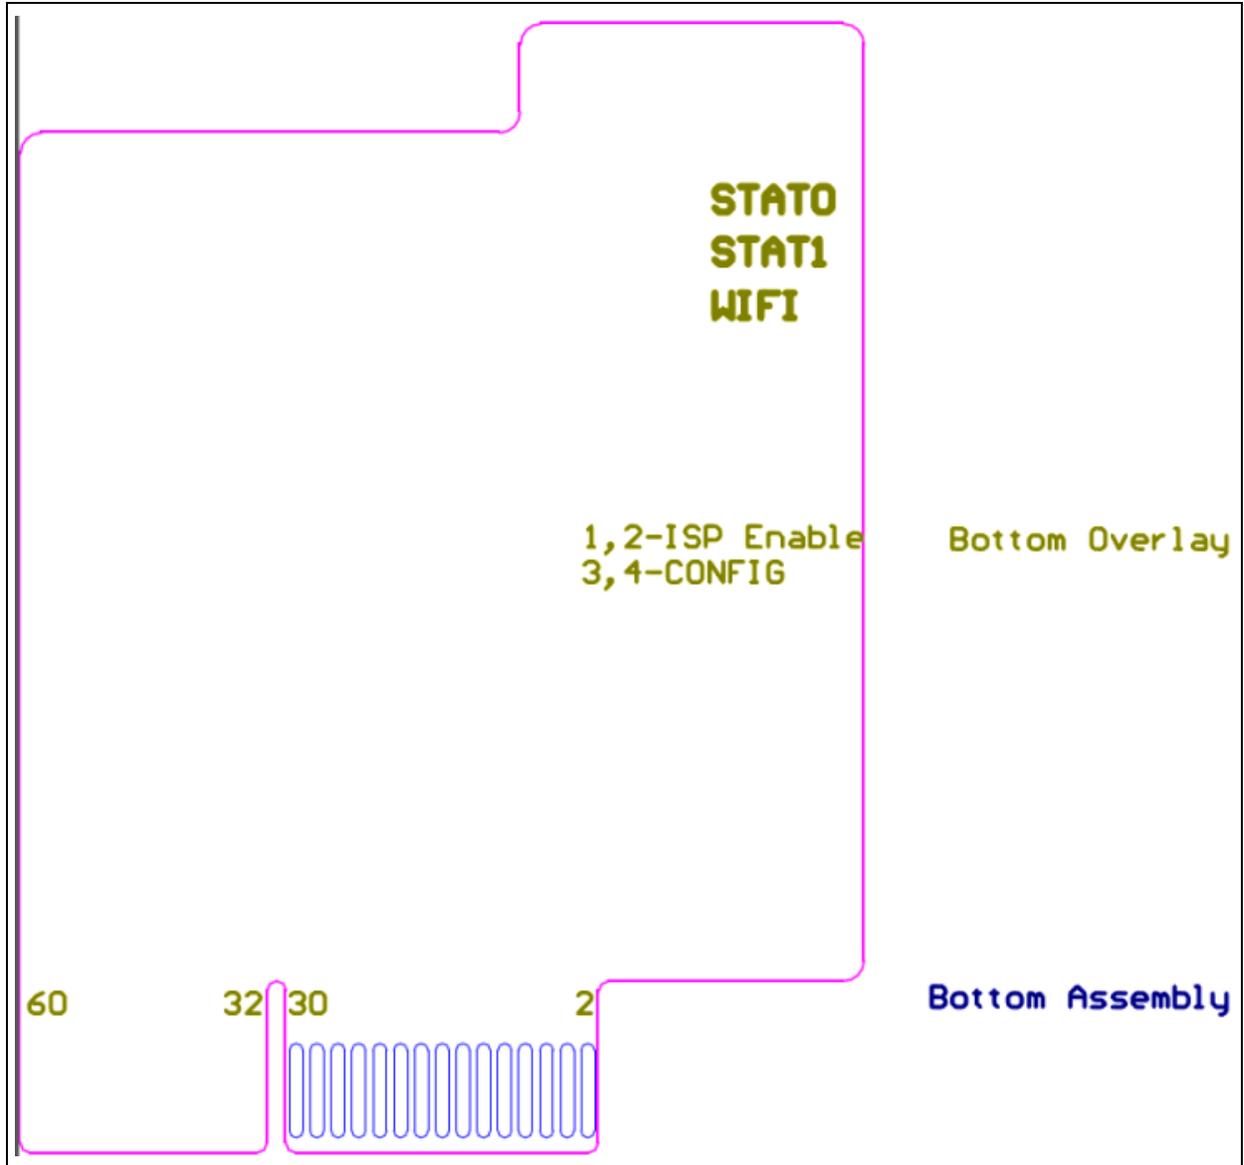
RN171 PICtail™/PICtail PLUS DAUGHTER BOARD BOTTOM ASSEMBLY DRAWING
